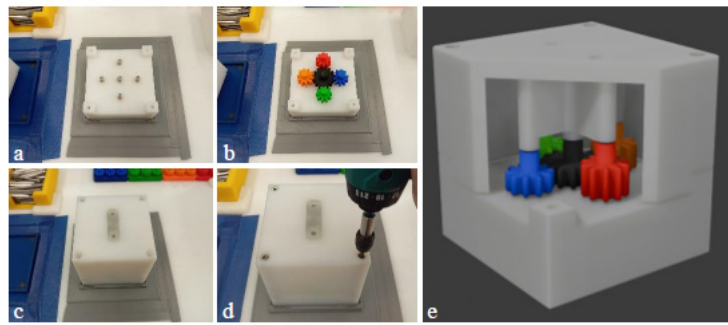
Assembly steps – *a.* the operator places the base piece on the table, *b.* the operator places the 5 gears of different sizes on the base piece in the correct positions, *c.* the operator places the cover on the base piece in the correct orientation to fit with the different gear sizes, *d.* the operator bolts the cover to the base piece using an electric screwdriver. Image *e* presents a cut-out view of the assembly which illustrates how the cover fits with the different gear heights.
